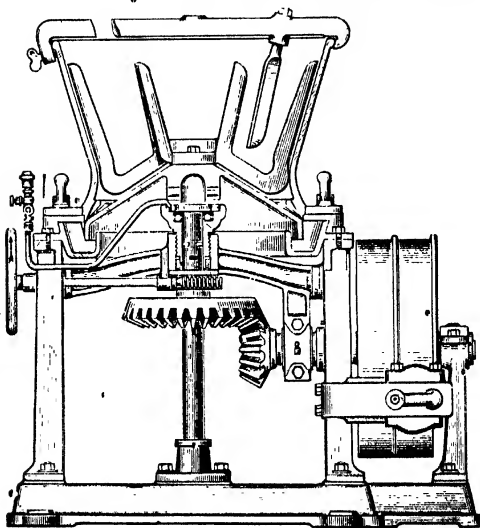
SECTIONAL VIEW OF "UNIVERSAL" CONE MILL (AS IN FIG. 11).
